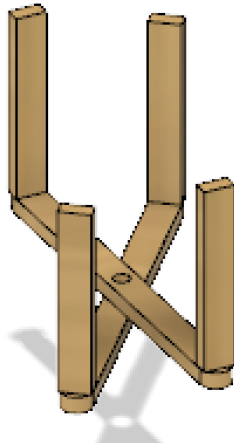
The structure with the rectangular pieces glued onto. The height of rectangular pieces is approximately 56.35 mm
